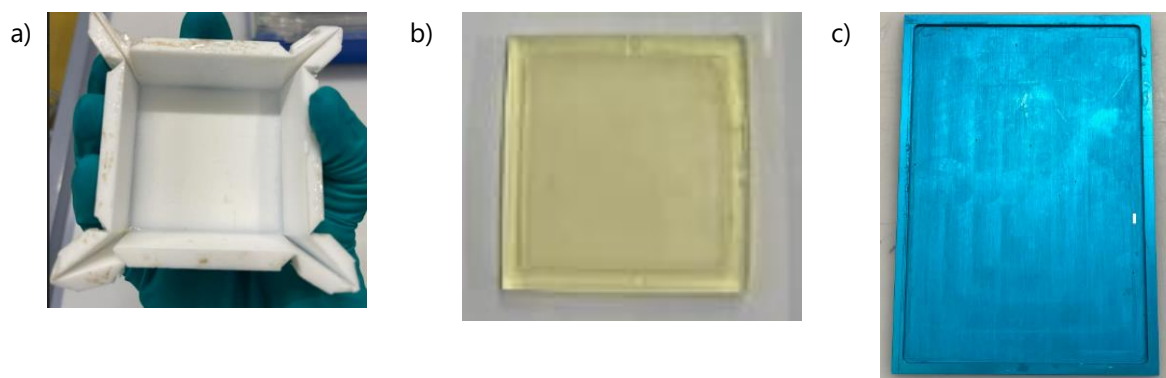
The molds used in the casting of epoxy resin samples a) Rigid white PTFE mold (5x5 cm²), b) Flexible yellow mold (5x5 cm²), and c) Blue metal mold (11x16 cm²)
